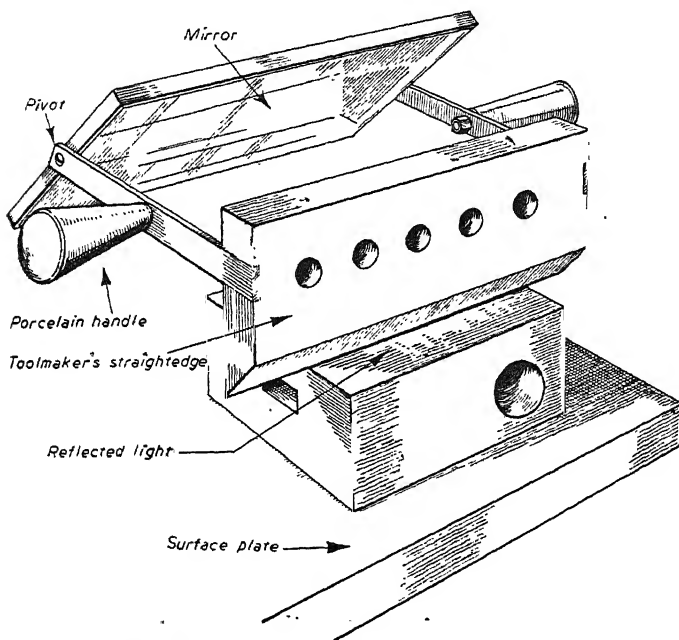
Flatness testing with toolmaker's straight edge fitted with mirror.
